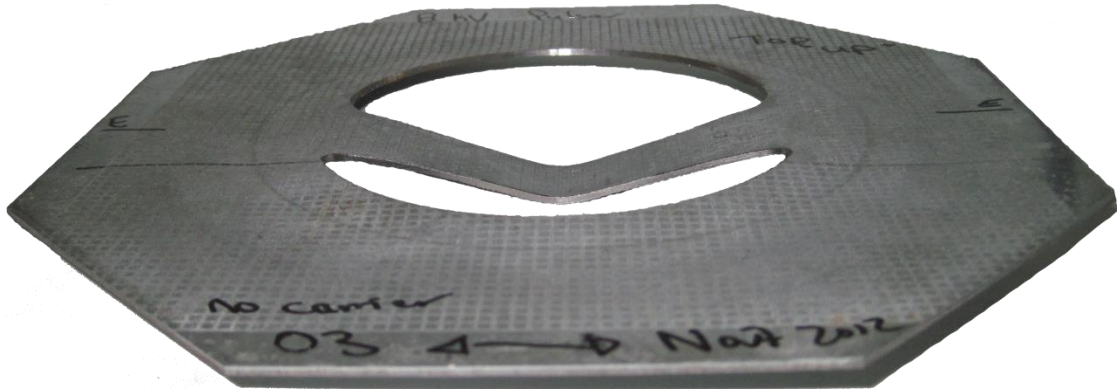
A uniaxial specimen formed into a 50 degree conical die had negative displacement due to water reflecting off of the forming tool.
